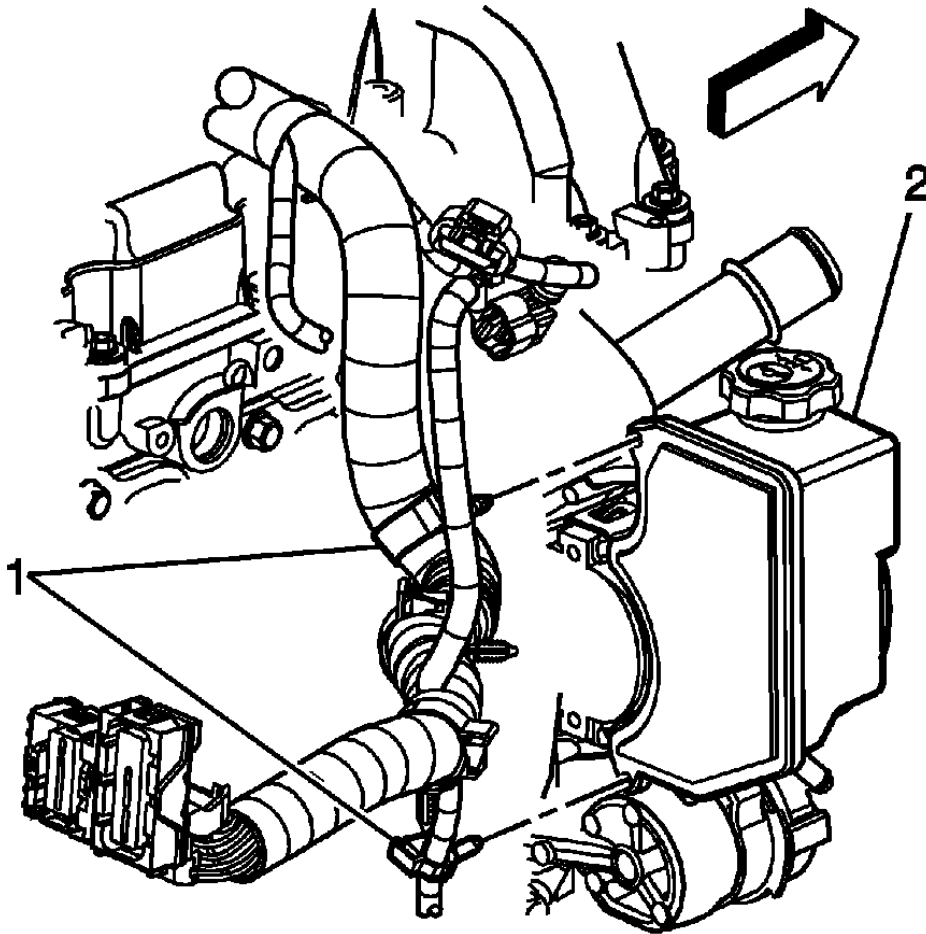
View Of Power Steering Pump & Engine Wiring Harness Retainers
